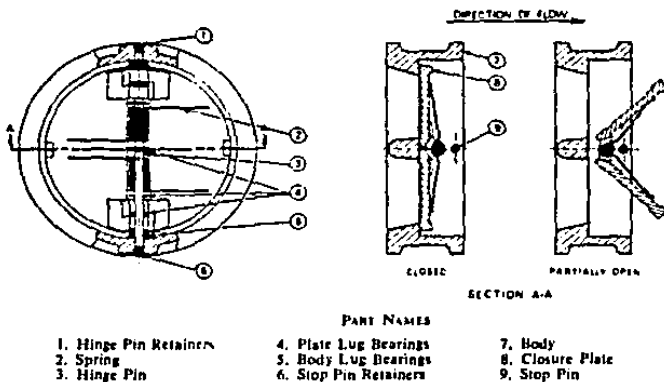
Typical Dual Plate Wafer-Type Check Valve.
